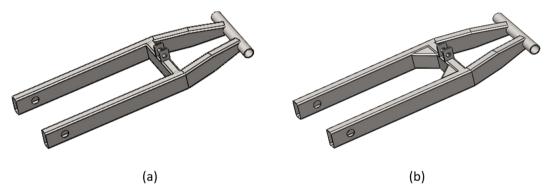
Swing arm (a) without gusset installation and (b) with gusset installation
